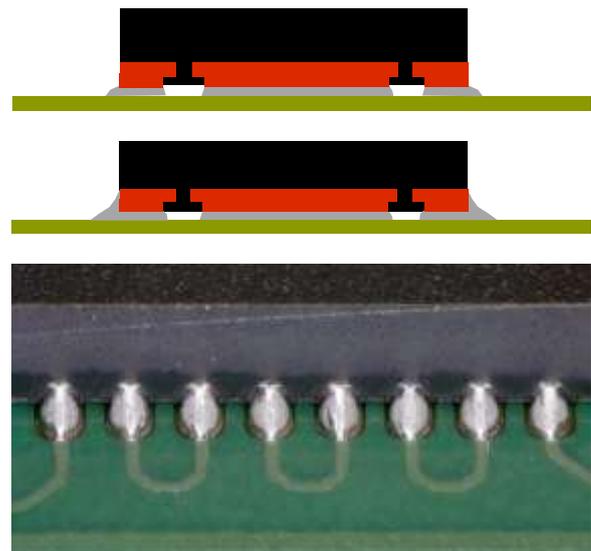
Soldering meniscus of standard QFN (top) and QFN with wettable flanks (middle). Board mounted QFN with wettable flanks (bottom) [1].
